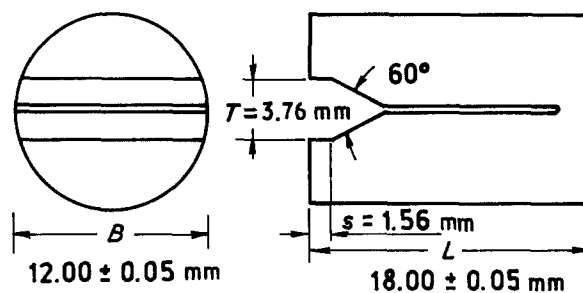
Short rod test specimen geometry for fracture toughness testing.
